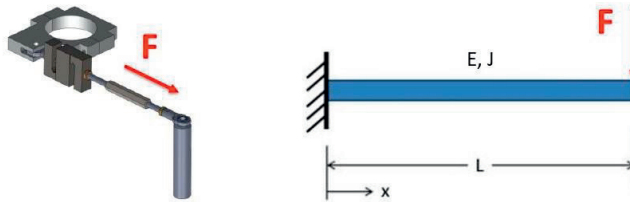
Instrumented rod with collar to hold the steering shaft. The rod is connected to aluminium cylinder, which can be schematised as a slender beam clamped to the chassis. F is the force acting on the collar and transmitted to the rod, L is the length of aluminium cylinder.
